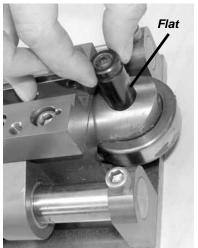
Remove the tracking wheel to inspect the bearing for wear.
